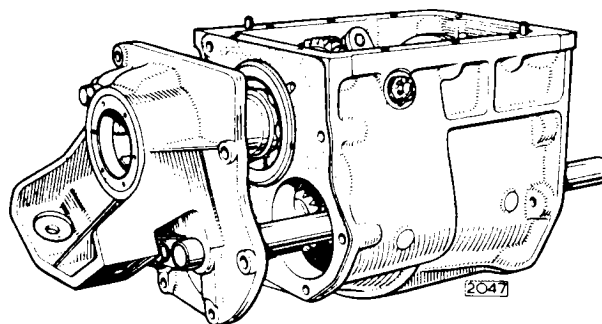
Showing the removal of the rear cover: note the dummy countershaft inserted at the front end of the casing
